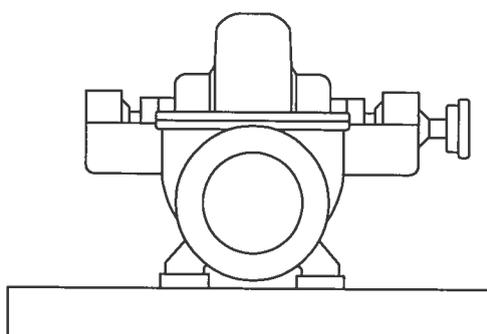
Pump type BB1: Horizontal, axial split, single and two stage, between-bearings design
